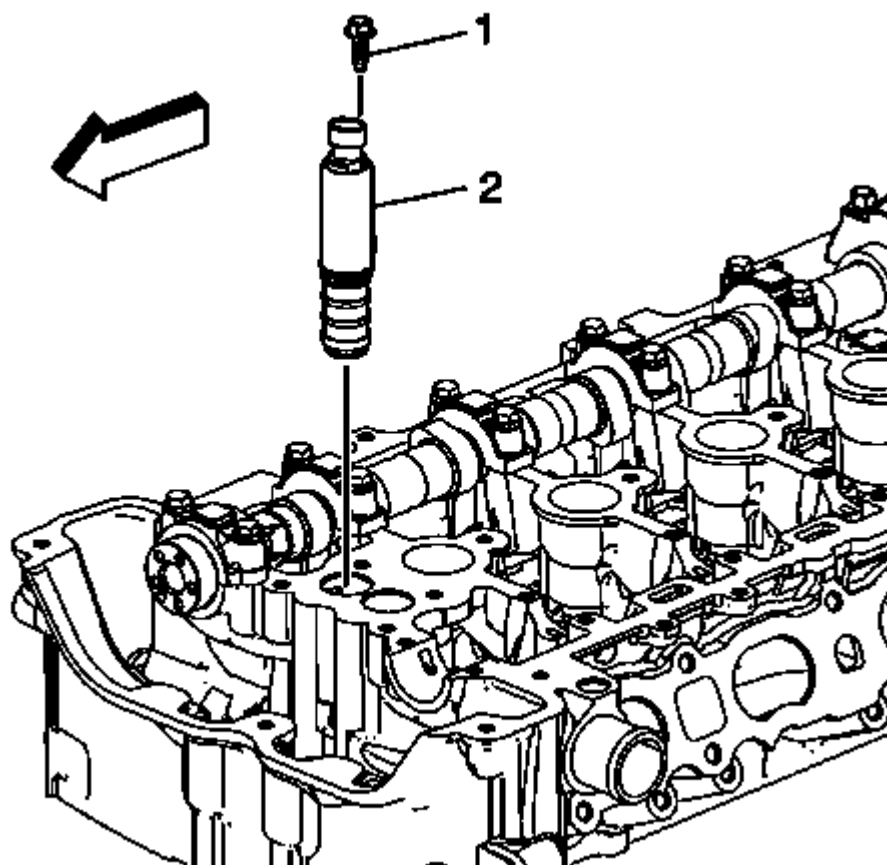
Exhaust Camshaft Position Actuator Solenoid Valve & Bolt
